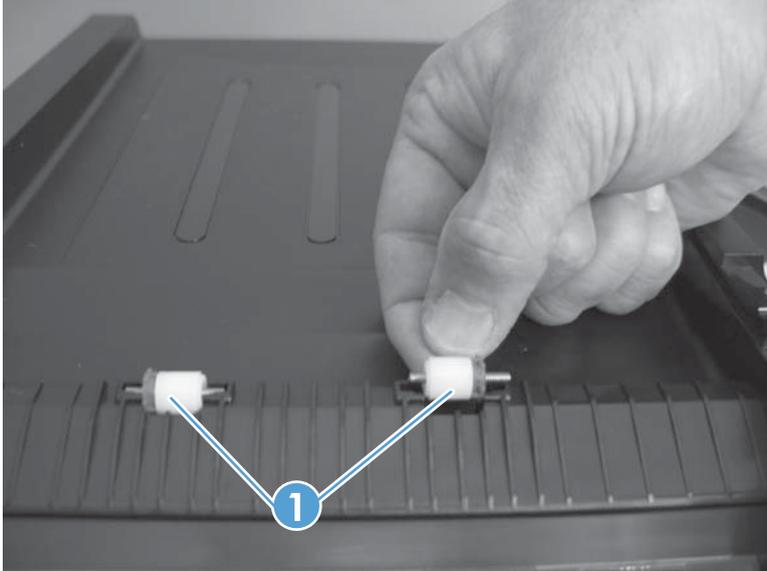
Remove the document feeder core assembly (3 of 3)
